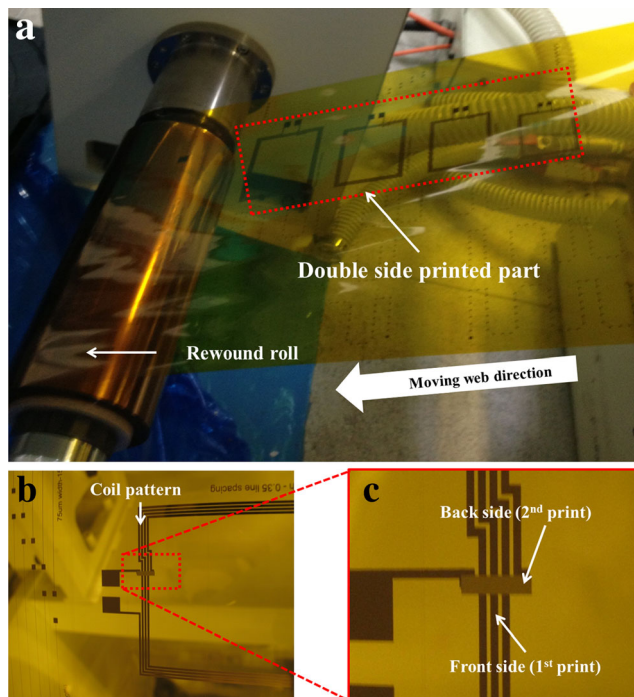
Double-side printing process using R2R gravure technology: a photo of the R2R gravure printing system, b image of double-side printed circuits, and c detailed view of the front side (main circuit) and back side of the circuit
